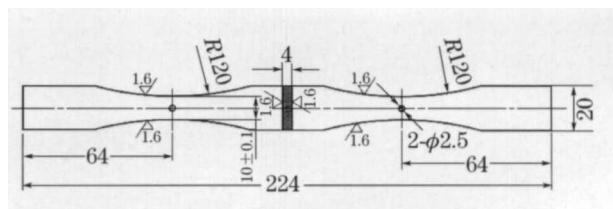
Fatigue specimen with two notches (holes) used for laser shock peening (in mm).
